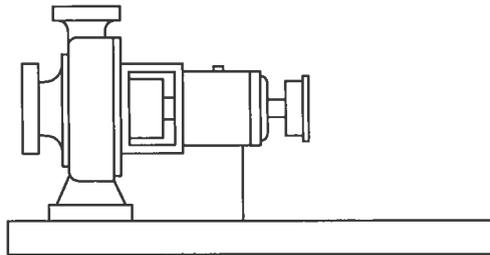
Pump type OH1: Horizontal, foot mounted, single stage, overhung design
